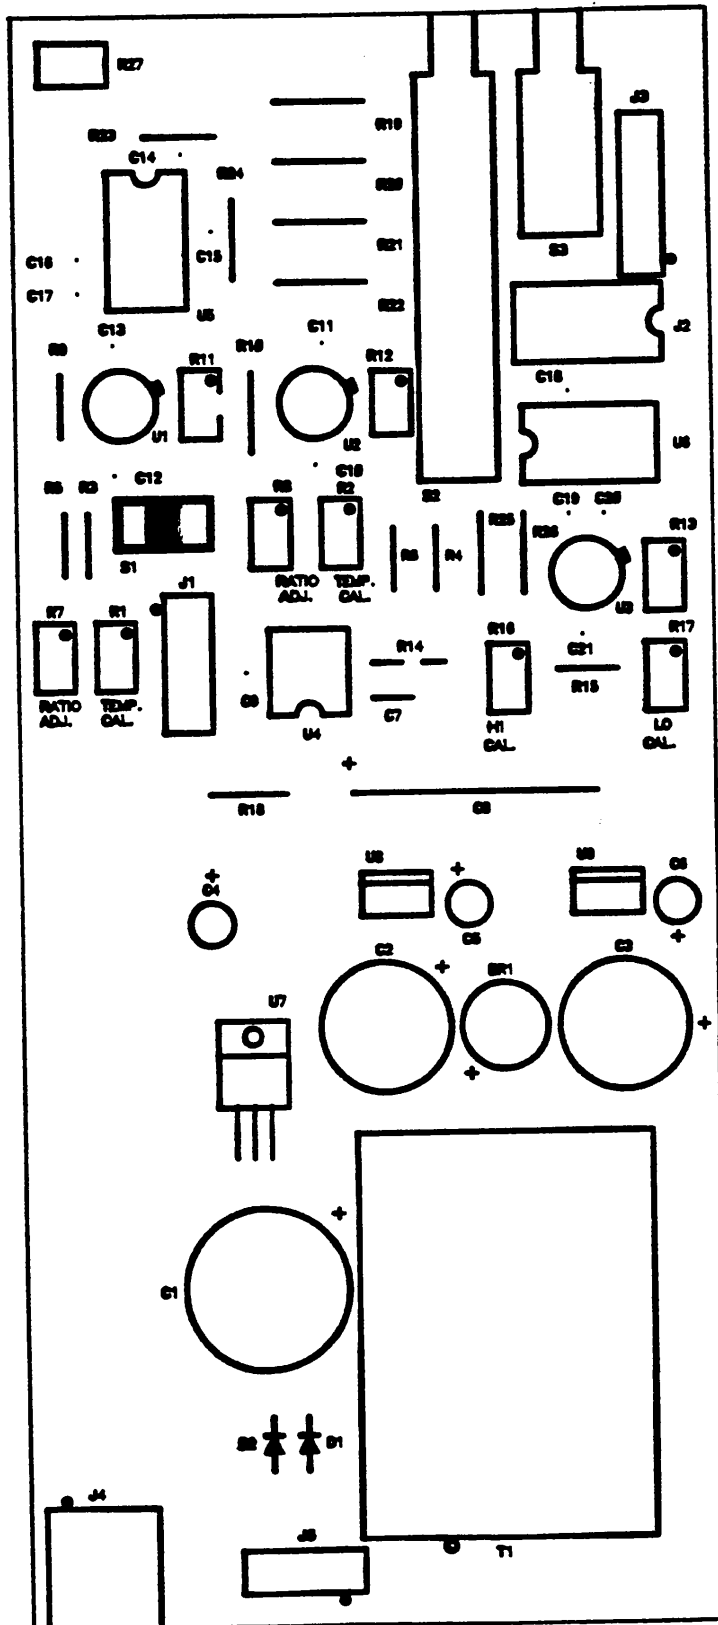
FLOW INDICATOR PC BOARD COMPONENT LAYOUT.
